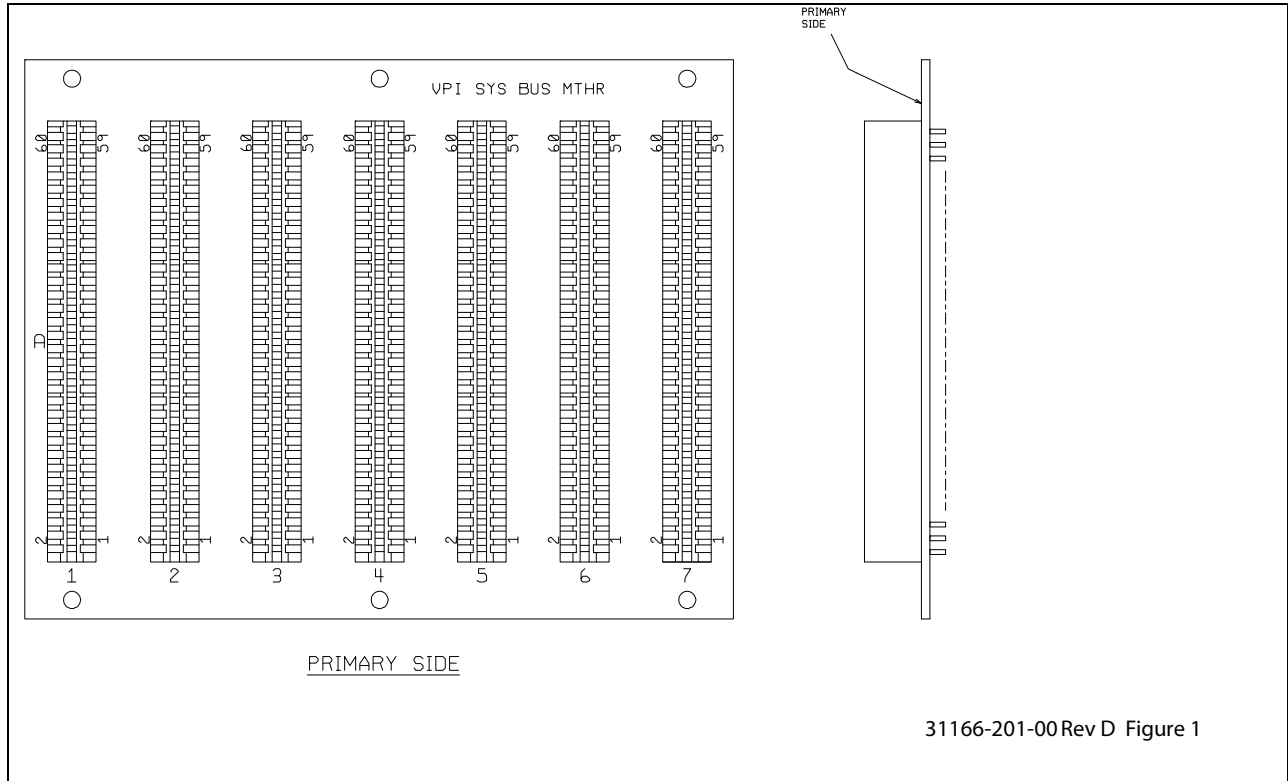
Main Bus Board Assembly, P/N 31166-201-07
